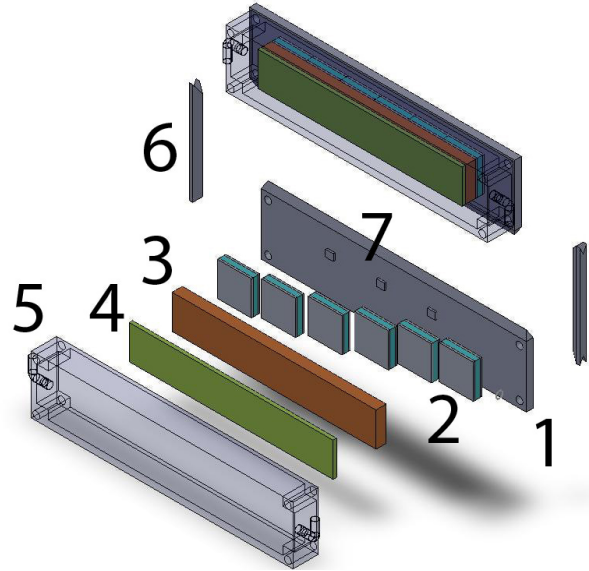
frame assembly explosion view. (1) aluminum base plate, (2) thermo-electric couplers array, (3) water cooling block, (4) insulation mat, (5) top cover, (6) adjustable vertical frame parts, (7) temperature sensors.
